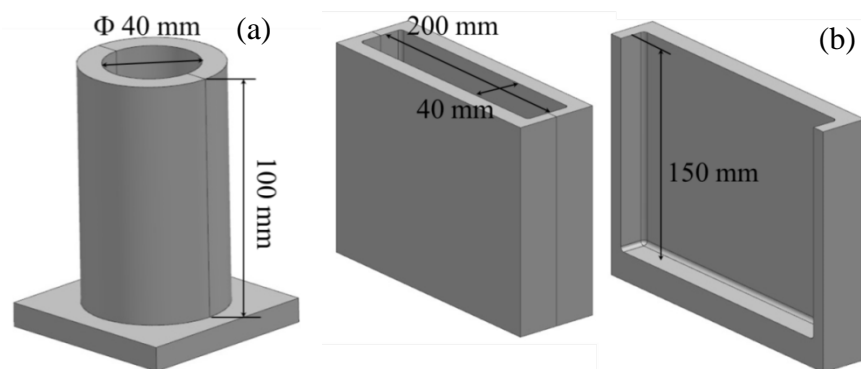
Geometry and dimension of different moulds for this research, (a) Φ 40 mm steel mould, (b) book billet mould with steel or insulation board.
